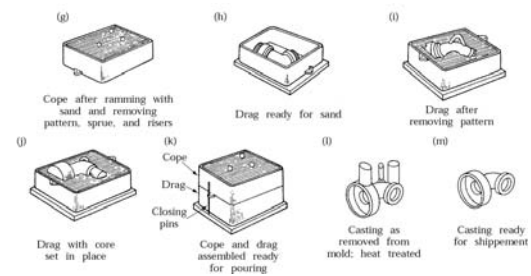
(g) The flask is rammed with sand and the plate and inserts are removed. (g) The drag half is produced in a similar manner, with the pattern inserted. A bottom board is placed below the drag and aligned with pins. (i) The pattern, flask, and bottom board are inverted, and the pattern is withdrawn, leaving the appropriate imprint. (j) The core is set in place within the drag cavity. (k) The mold is closed by placing the cope on top of the drag and buoyant forces in the liquid, which might lift the cope. (l) After the metal solidifies, the casting is removed from the mold. (m) The sprue and risers are cut off and recycled and the casting is cleaned, inspected, and heat treated (when necessary).
